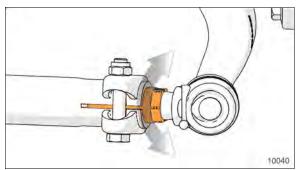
FINE ADJUSTER SLEEVE ON TIE ROD
